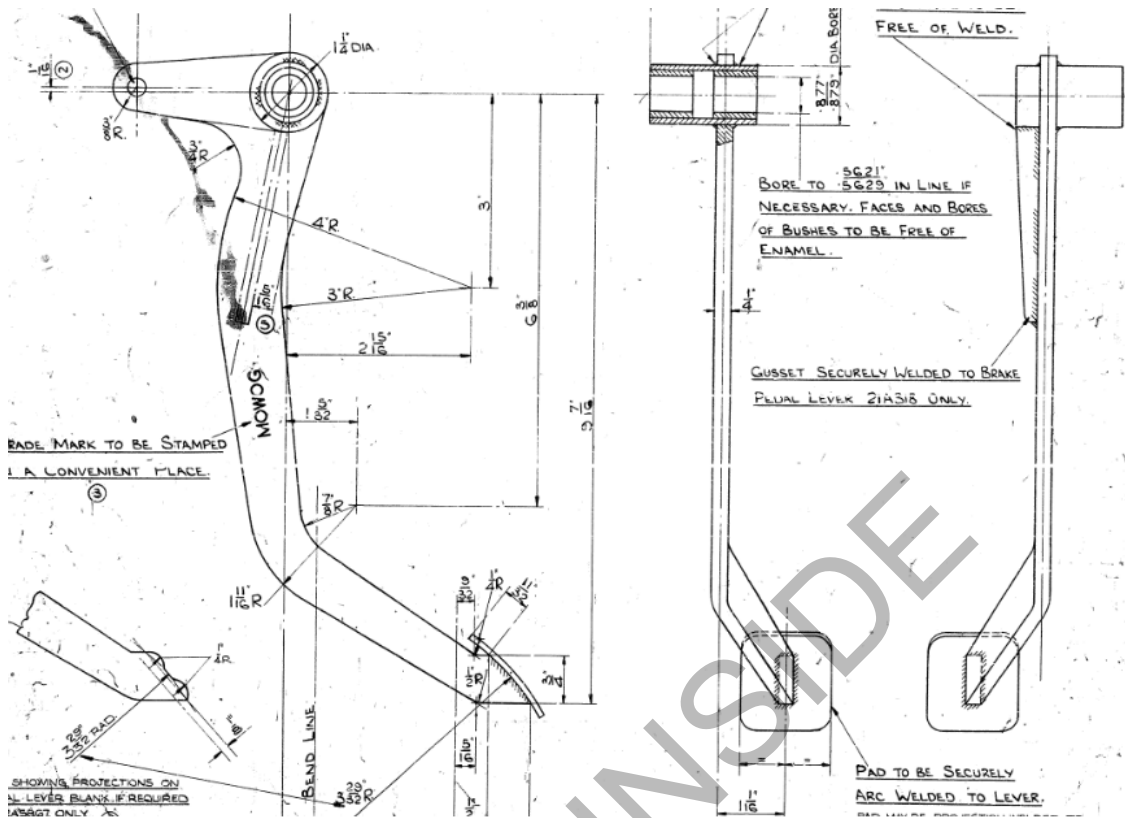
Brake and clutch pedals 2A5866.
